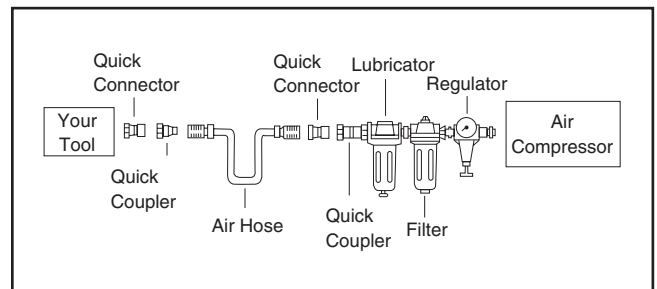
Installing a filter/lubricator/regulator to improve the lifespan of your tool.
